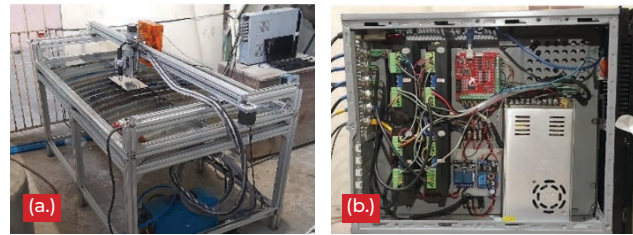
The prototype (a) Inkjet marker embedded on the plasma cutter (b) electronic parts
